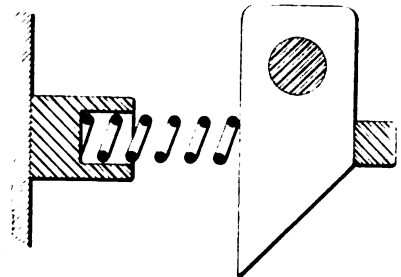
DOG FOR RECIPROCATING MACHINE PART
